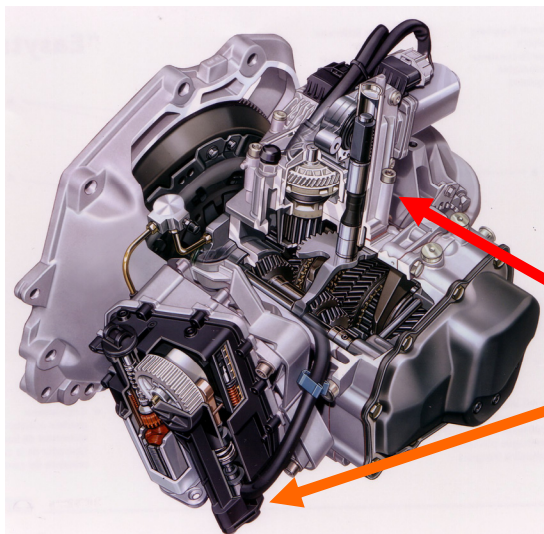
Opel automated five speed gearbox with sequential shift by shift cylinder [12].
